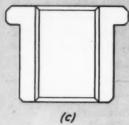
Left — Design of plated cylindrical single-flanged bushings
